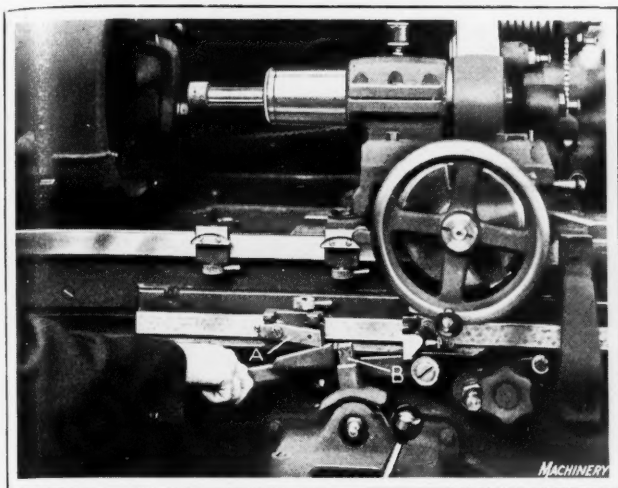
Quick-return Mechanism for Table of Heald No. 72 Internal Grinding Machine
